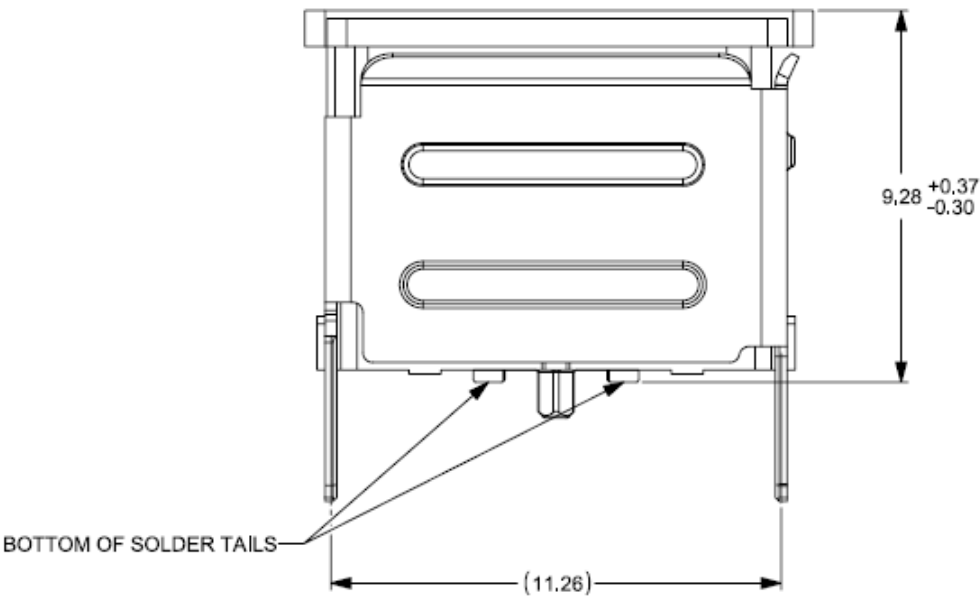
Profile View of Fixed-Side Connector with Dust Cover
